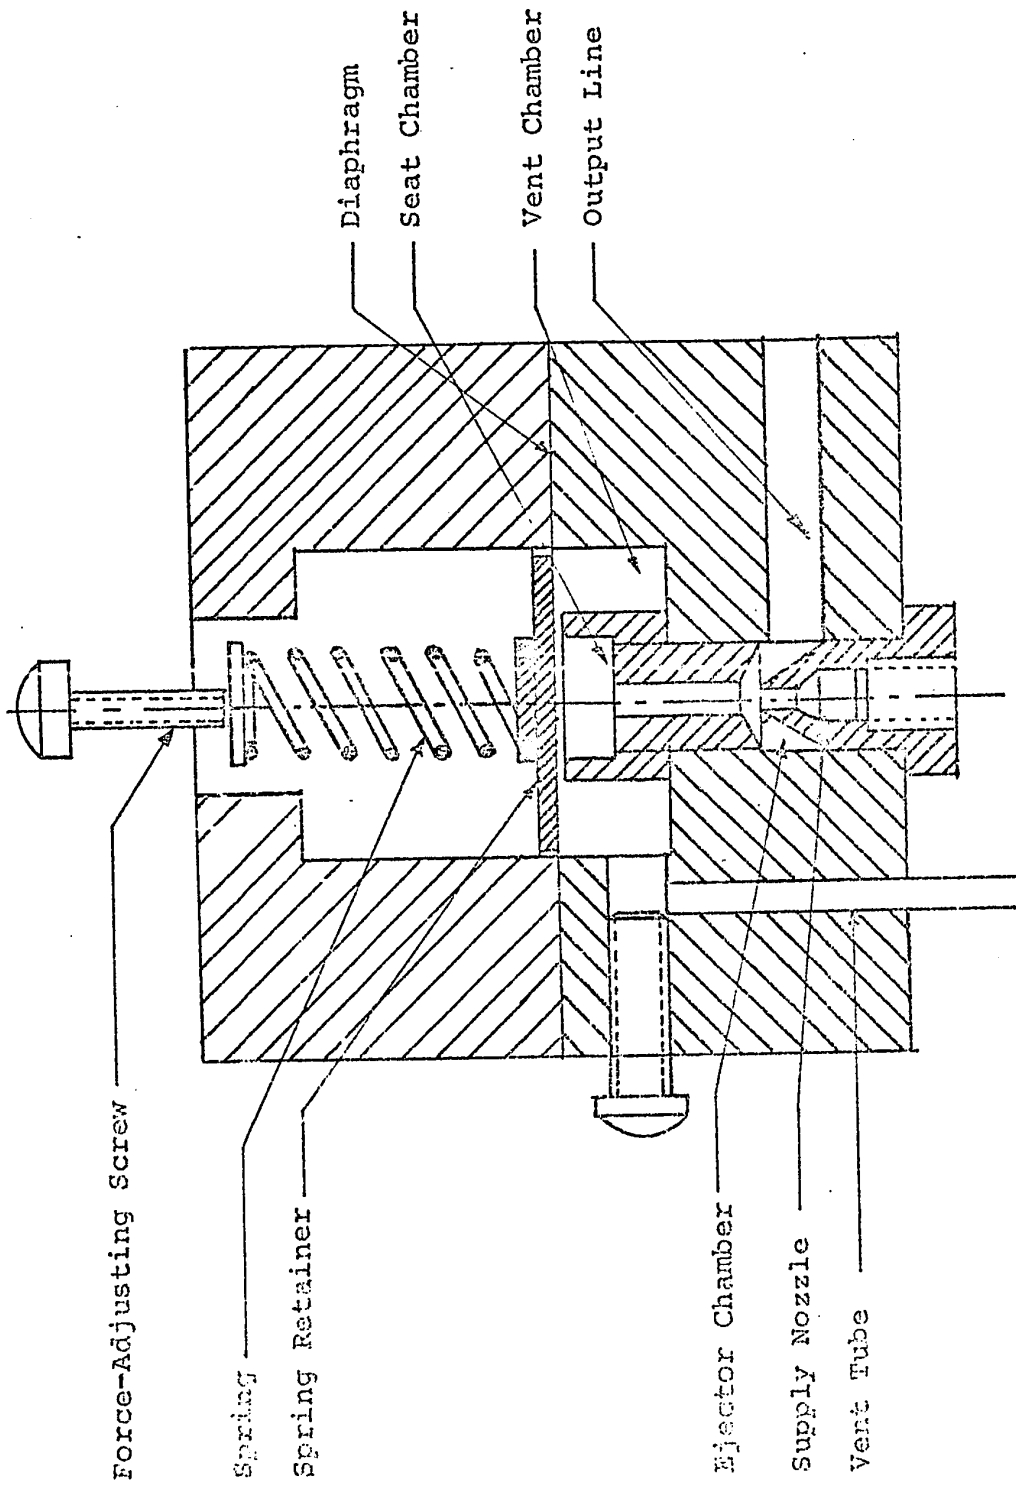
SCHEMATIC CROSS-SECTIONAL VIEW OF FLUID OSCILLATOR.
